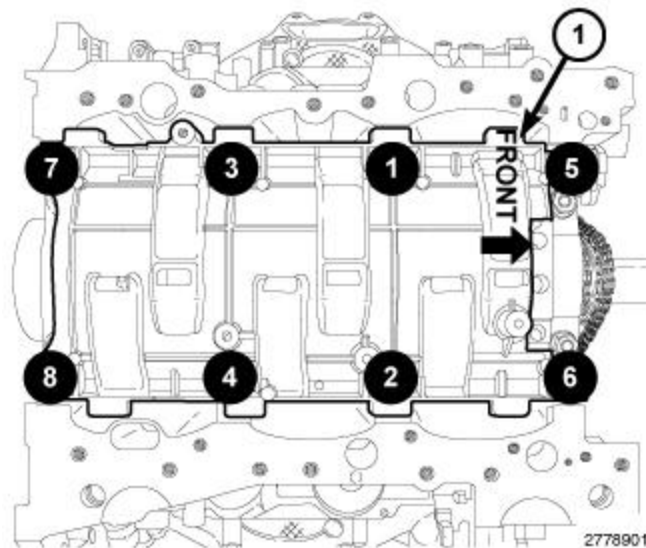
Windage Tray With Main Bearing Cap Bolts Installation Sequence
